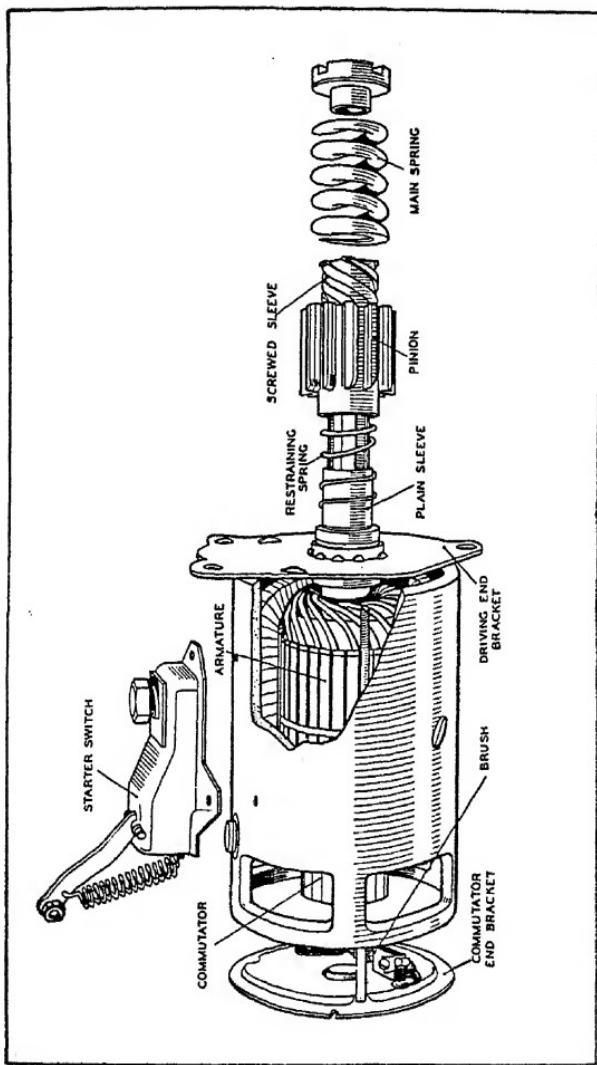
LUCAS STARTER WITH BENDIX DRIVE
